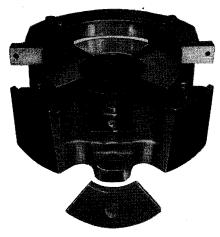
TYPICAL COMBINED GUIDE AND THRUST BEARING FOR SMALL WATER WHEEL GENERATORS (ONE SHOE AND ONE-HALF OF GUIDE BEARING REMOVED).
